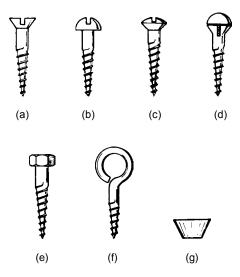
Types of heads: (a) Countersunk; (b) Roundhead; (c) Raised head; (d) Dome head; (e) Coach screws; (f) Screw eyes; (g) Brass cups
